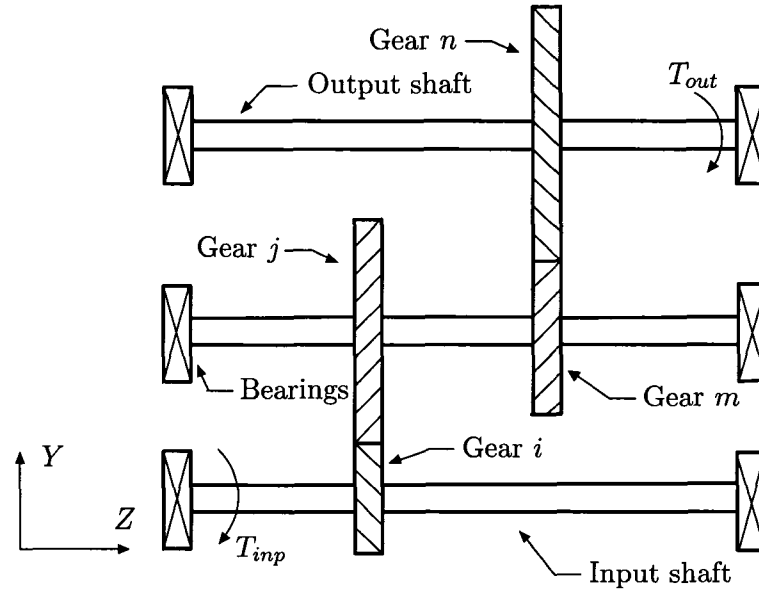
Gearbox layout.* This figure represents the gearbox orientation with all the components. The gearbox model contains three shafts, four helical gears, and six bearings. The housing is assumed to be rigid.
